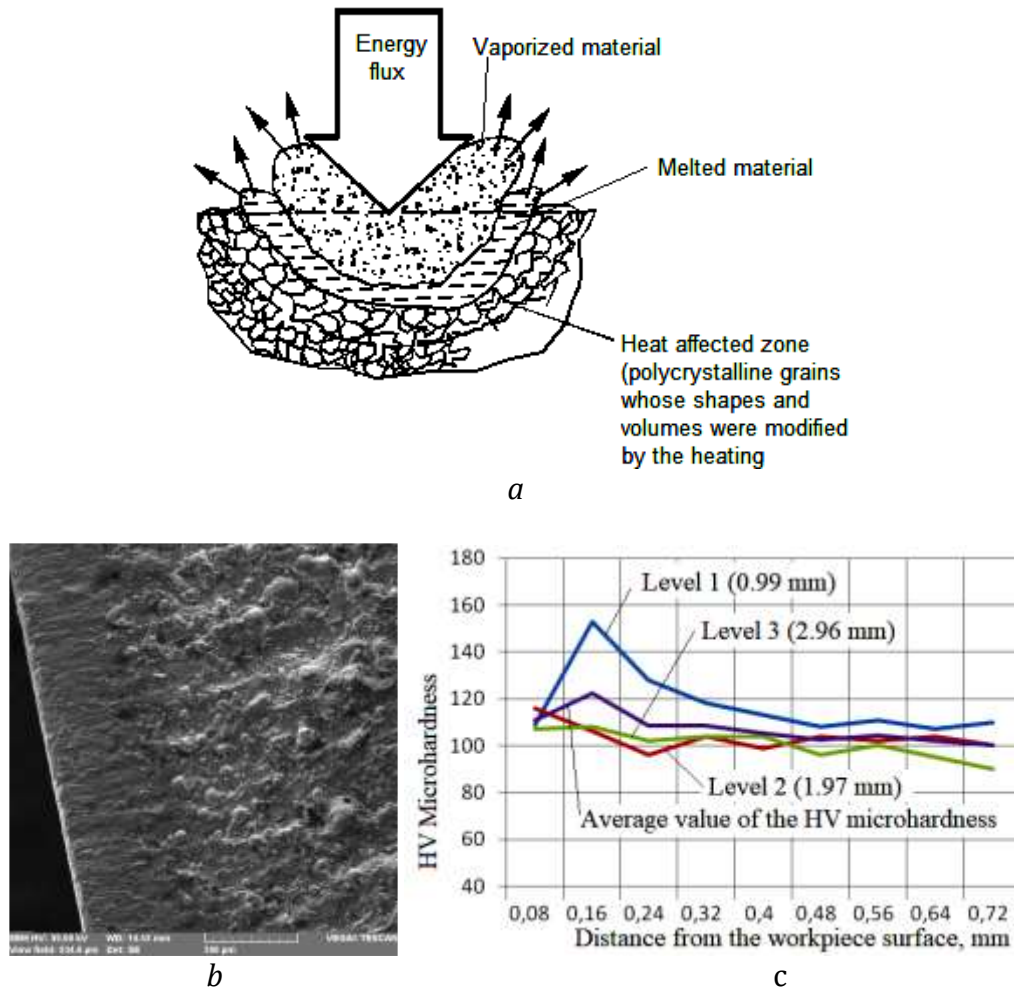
Changes in the polycrystalline surface layer in the case of the machining methods based on the workpiece localized material heating: *a* – schematic representation ; *b* – aspect of the machined surface, test piece made of steel C30, laser power of 520 W, $v=4$ mm/s, laser pulse frequency $f=120$ Hz ; *c* - influence exerted by the distance from the workpiece surface on the *HV* microhardness of the surface layer) [8].
